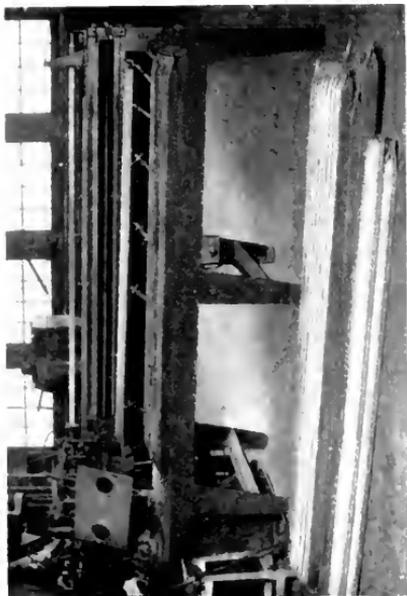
Corrugations Set Up Ready for Welding by Machine. The Clamps are removed as the arc approaches them
